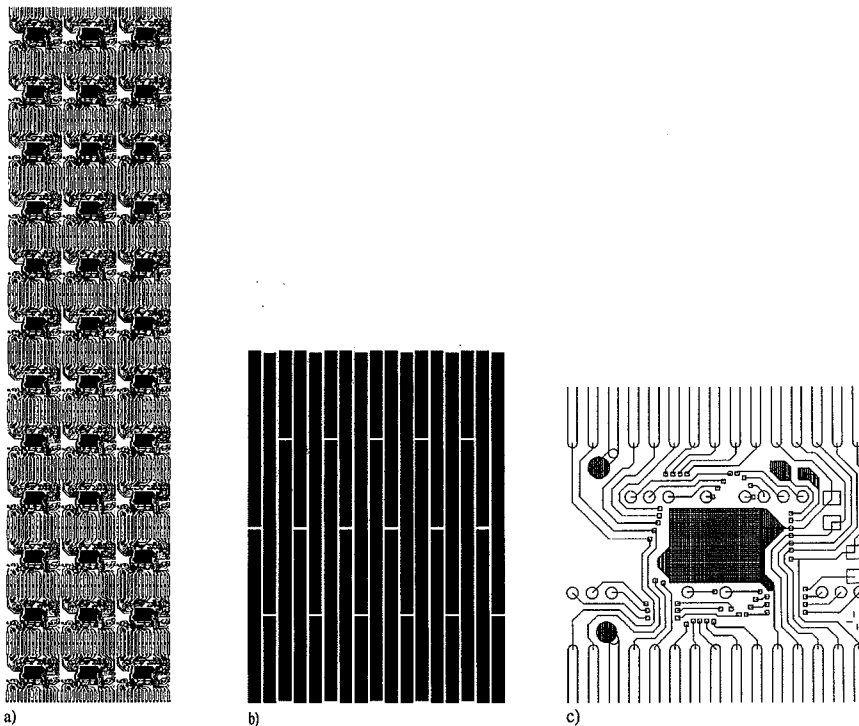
Printed circuit board for mounting of the readout chips. (a) Chip side of the board showing the communication lines and chip positions and (b) Magnified part of pad side (padsize  $1 \times 17 \text{ mm}^2$ ) and (c) Magnified view of the area around one chip.
